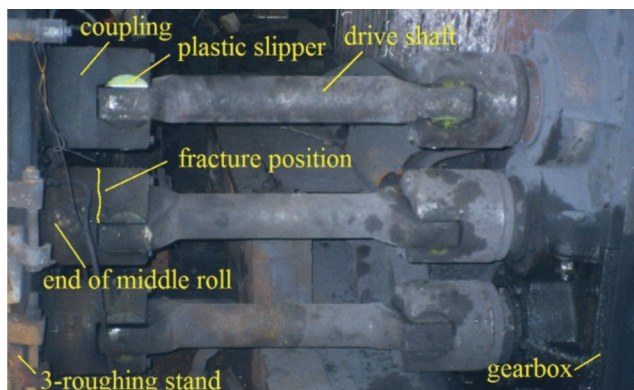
Shafts and couplings between the 3-high-roughing stand and the gearbox
